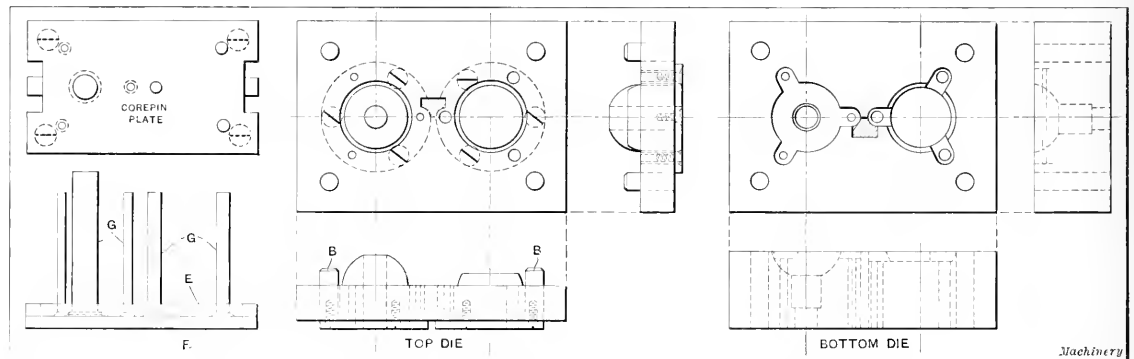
Core-pin Plate, Top Die and Bottom Die for Die-casting Mold
